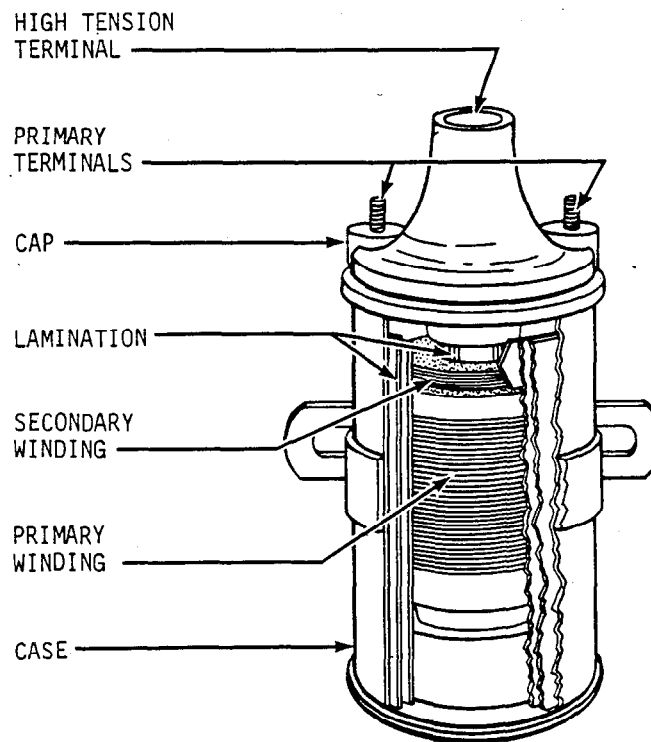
CONSTRUCTION DETAILS - TYPICAL IGNITION COIL
